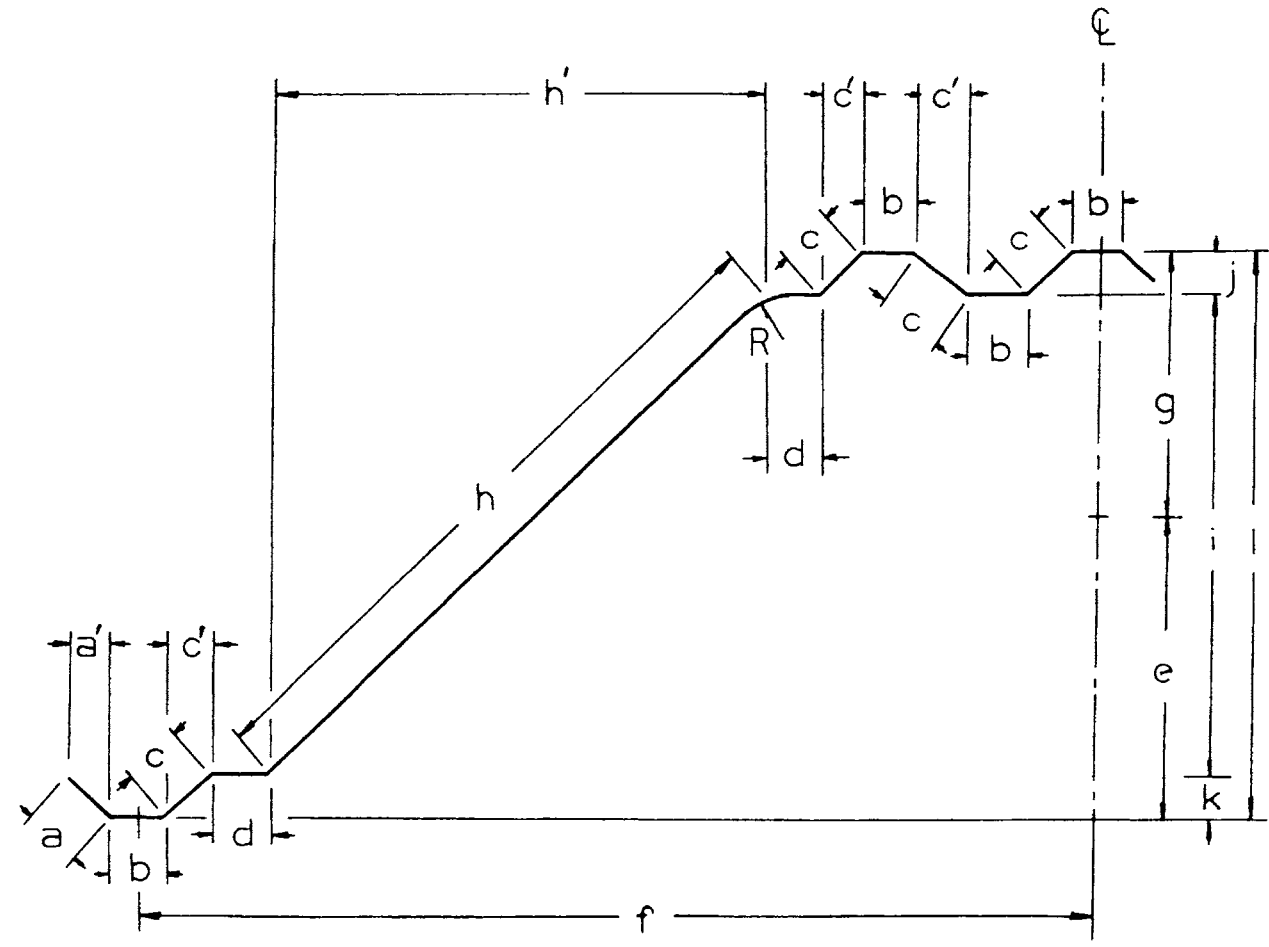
TYPICAL PANEL TEST SPECIMEN
